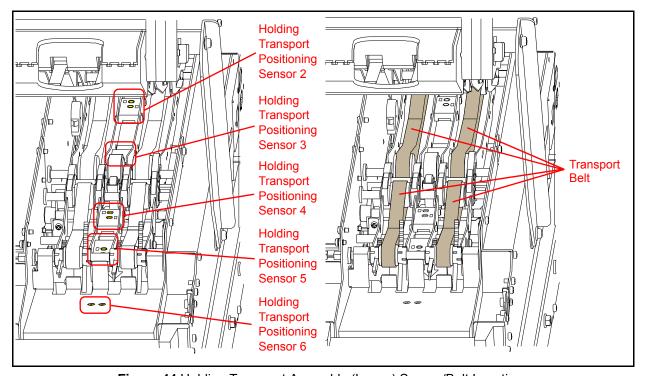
Holding Transport Assembly (Lower) Sensor/Belt Locations
